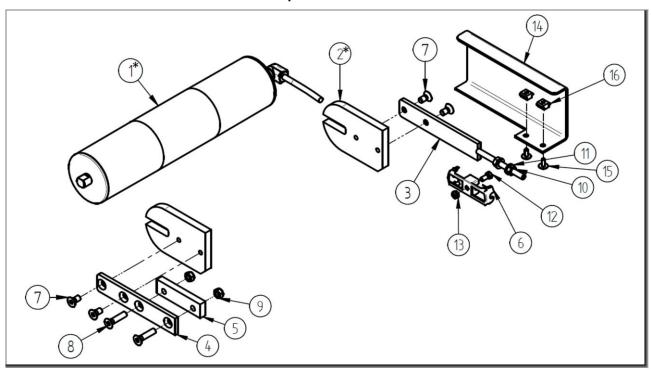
Parts list: Drum motor - drive unit - position of drive unit 23 - ZZ.900.0094.01
